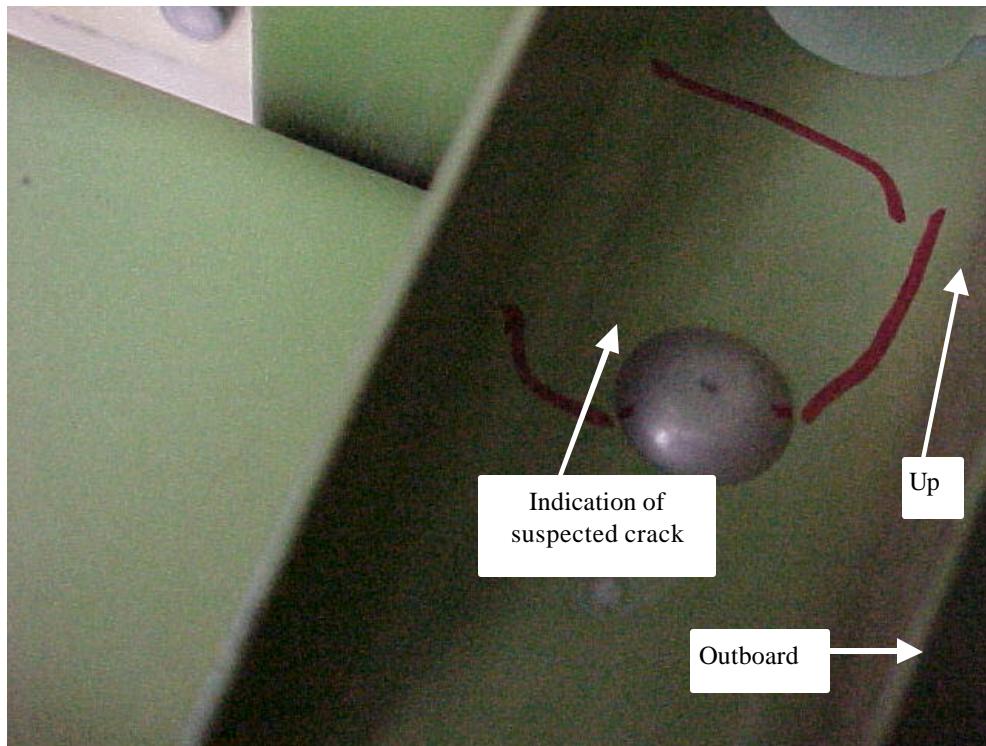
Photograph of stringer clip at FS 720, stringer 4R. Detailed visual inspection discovered an indication.
